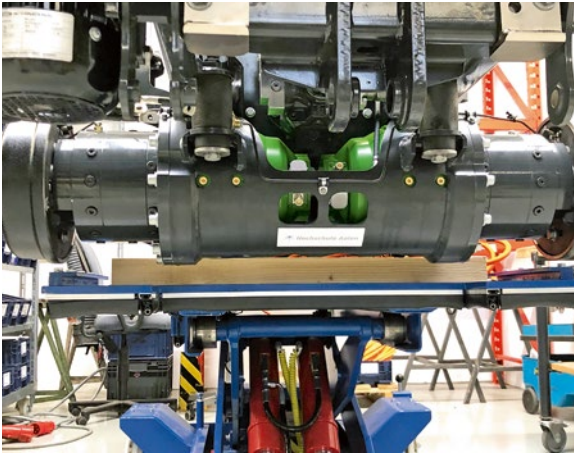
Complete unit of a drive axle (© Sebastian Reusch | Max Holder GmbH Reutlingen)
